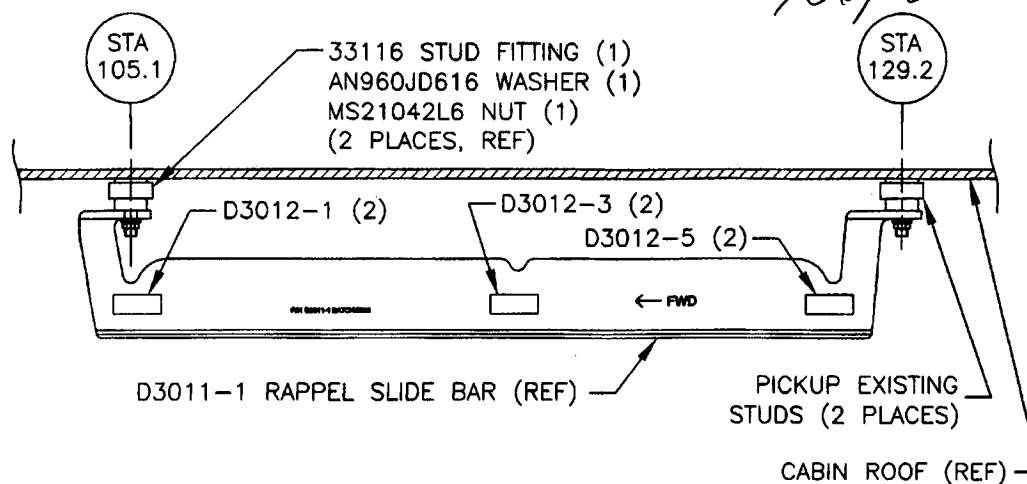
Installation of D205-523-043 Slide Bar Assembly
